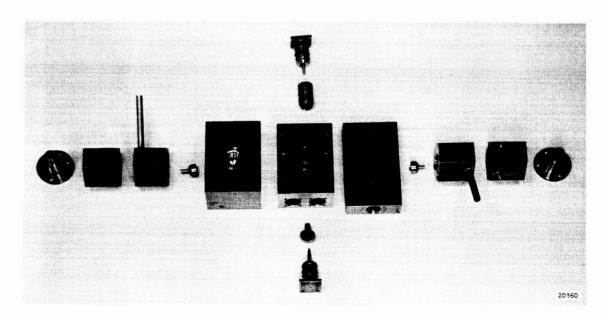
Photograph of Breadboard Servovalve (Exploded View)
